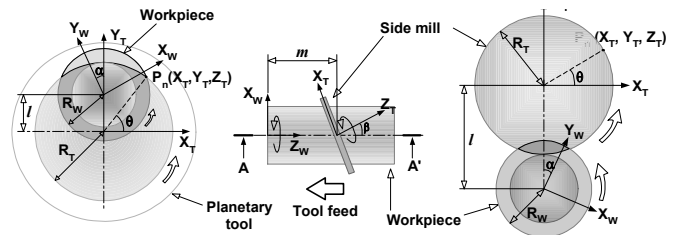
Mechanism of Worm Machining in Automatic Lathe
